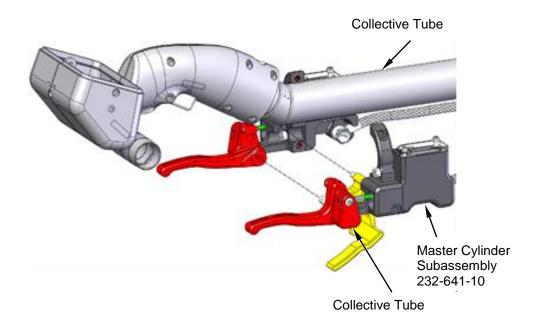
Installing the Port Master Cylinder Assembly – Dual Hook
